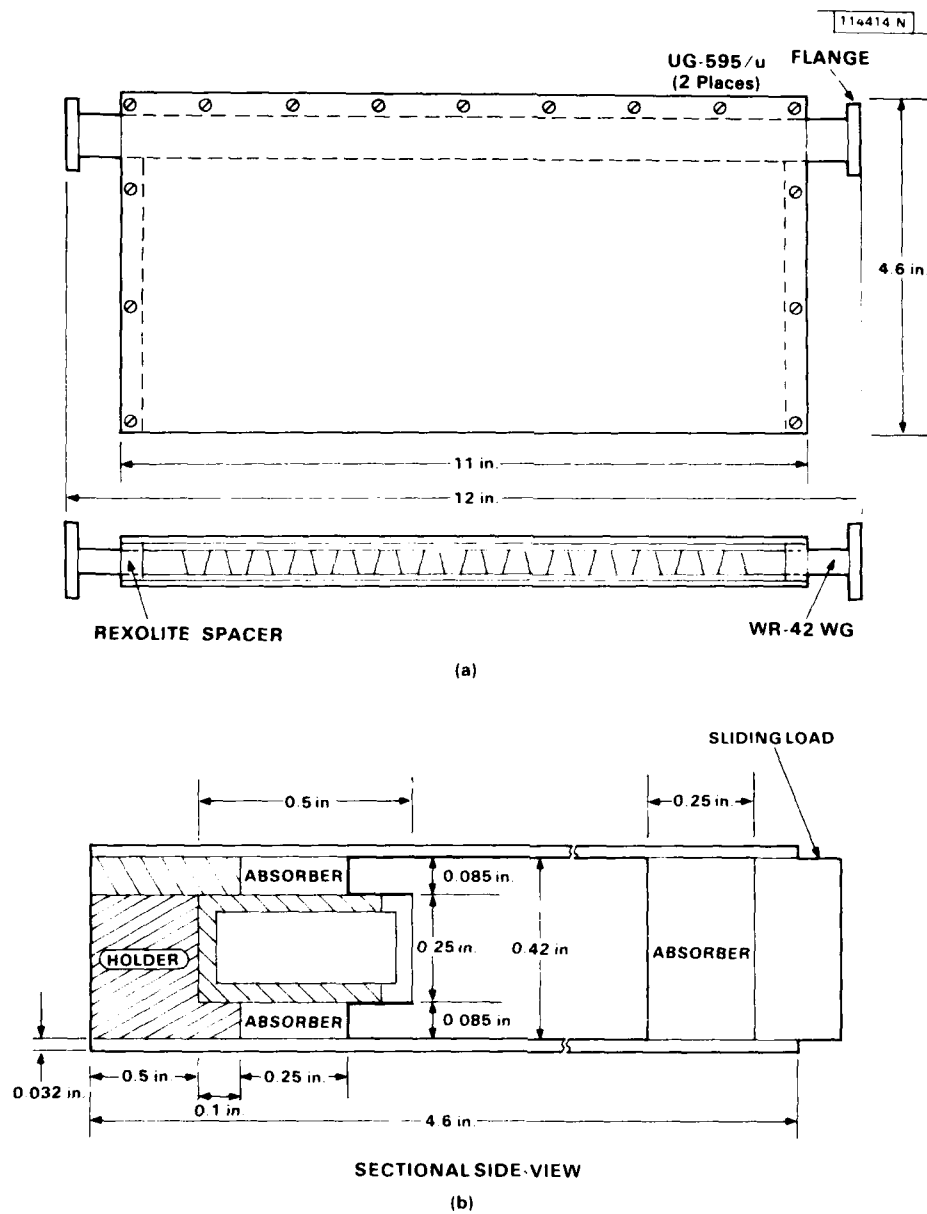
(a) 12-in. slot array parallel plate fixture, (b) sectional side view.
